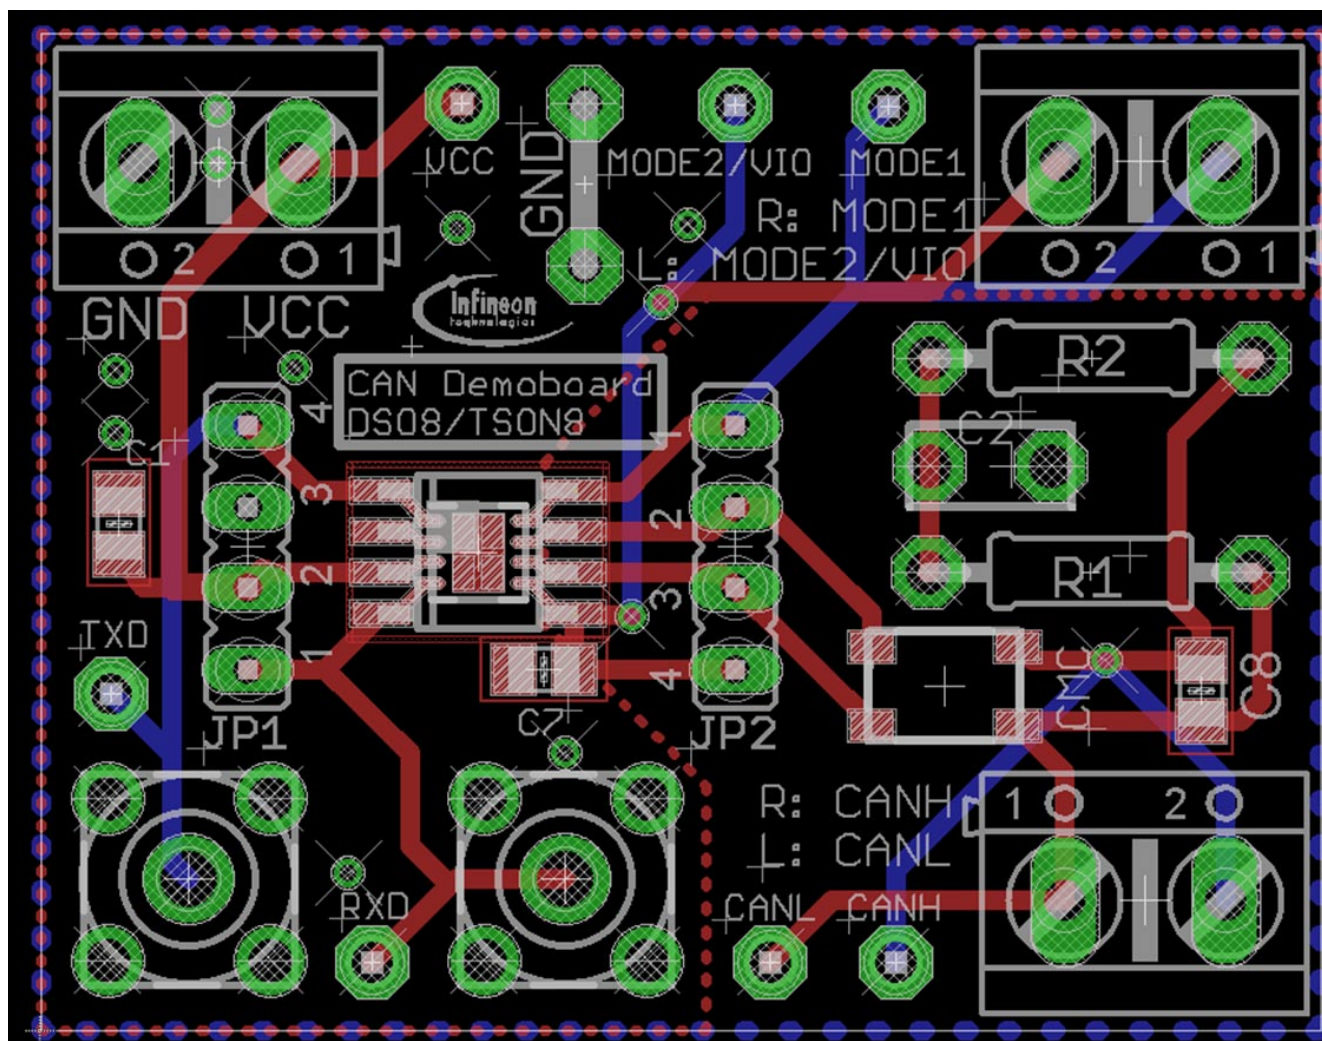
PCB layout of TLE925X demoboard (Top + Bottom)
